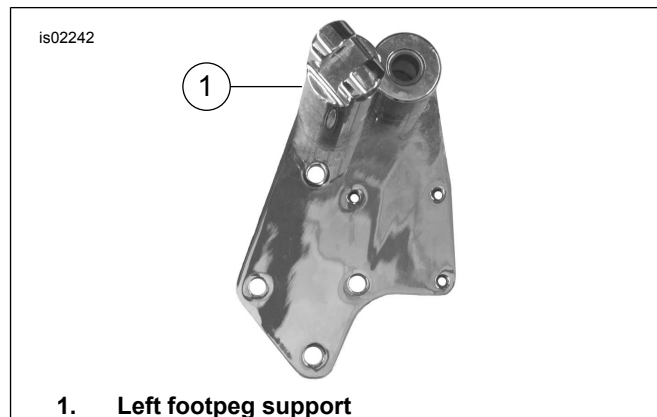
Install Left Footpeg Support to Shifter Mounting Plate
